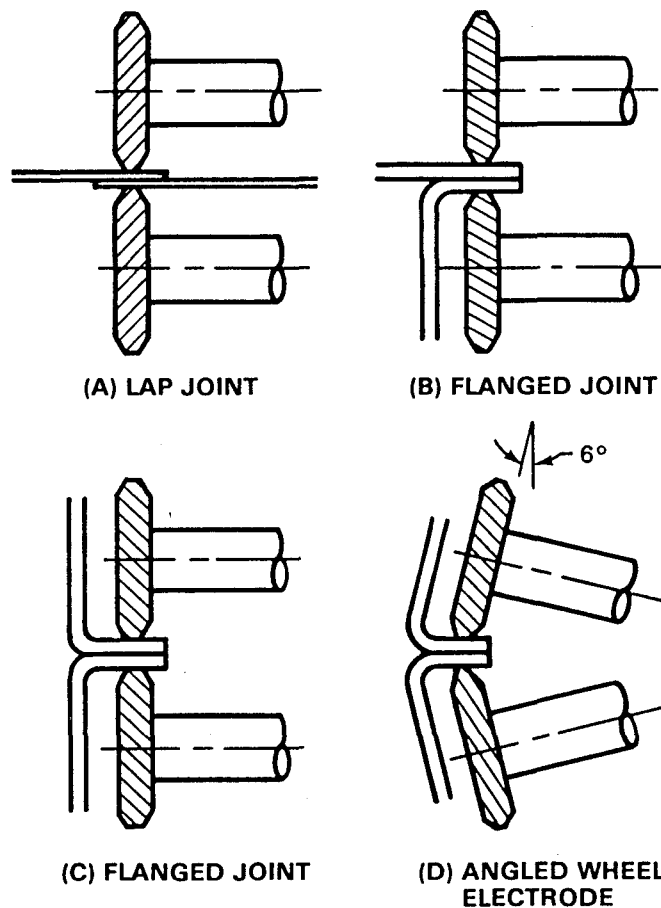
Examples of Resistance Seam Welded Joints
